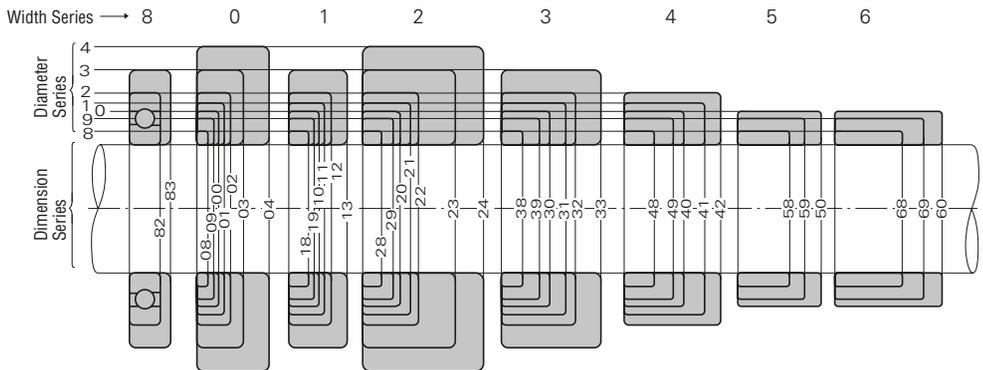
Comparison of Cross Sections of Radial Bearings (Excluding Tapered Roller Bearings) for Various Dimensional Series
